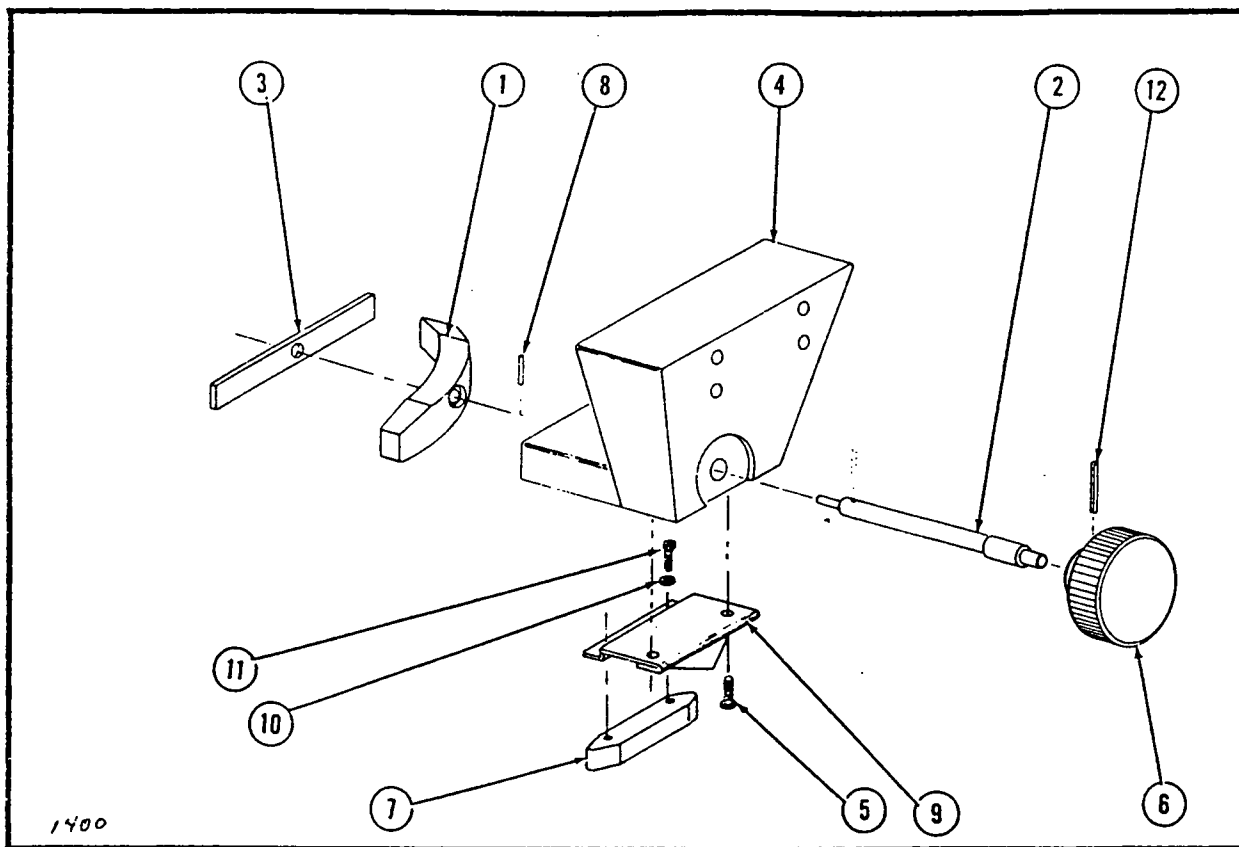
ROTATIONAL BRAKE - Part No. 181464
